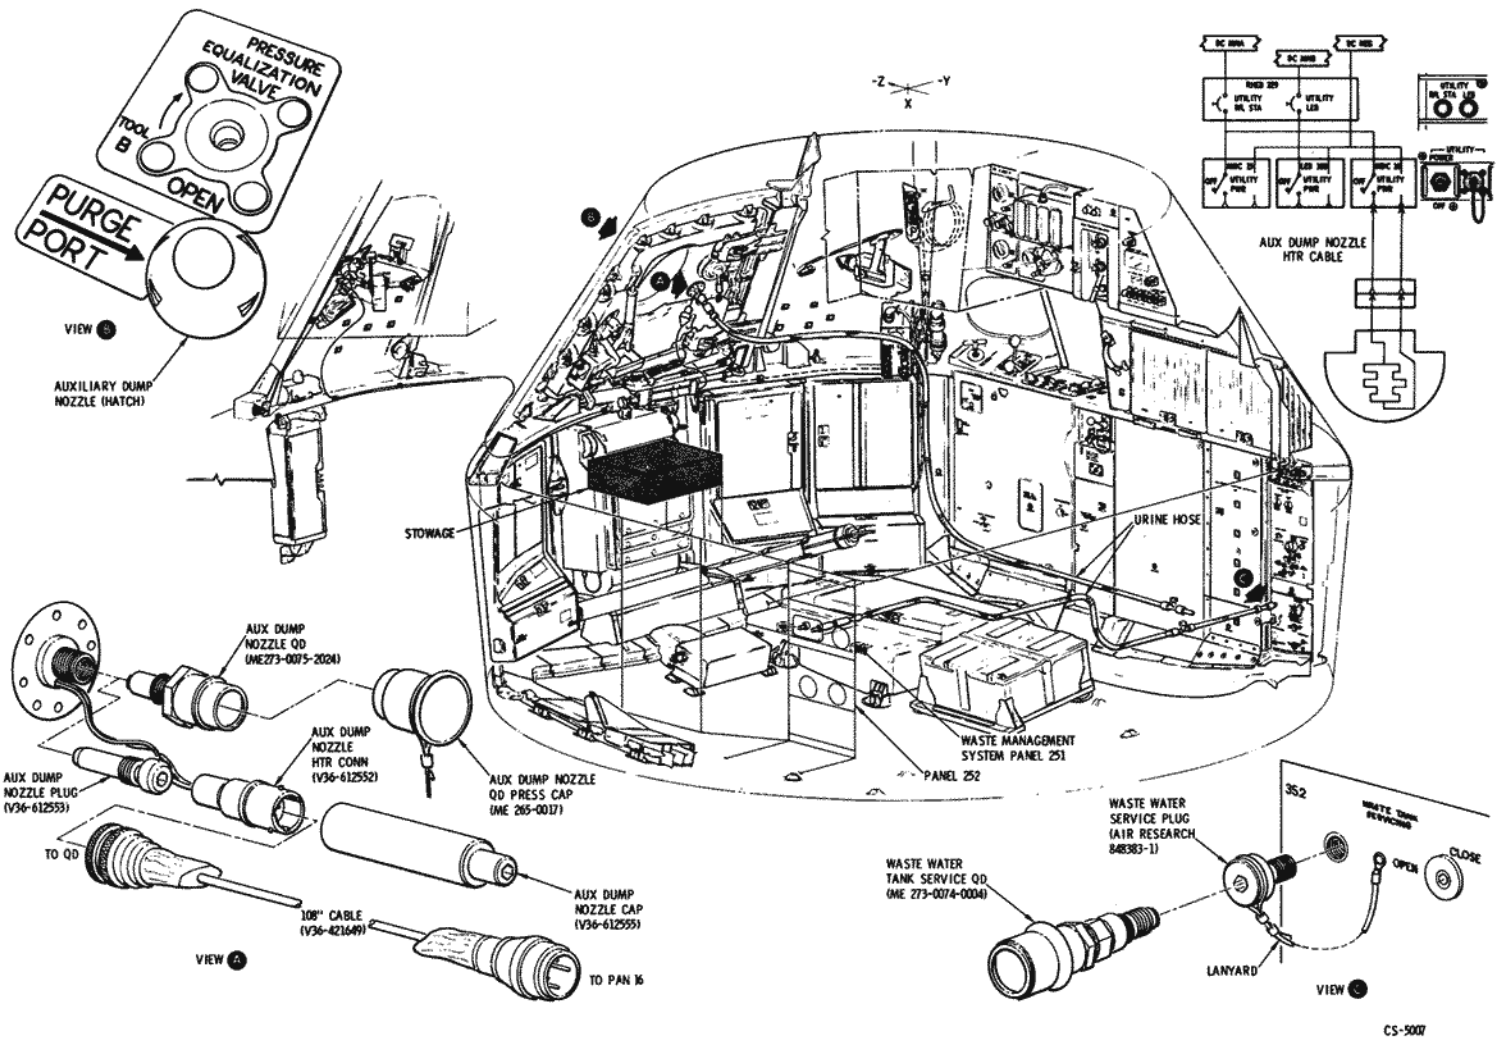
Auxiliary Dump Nozzle Operations
